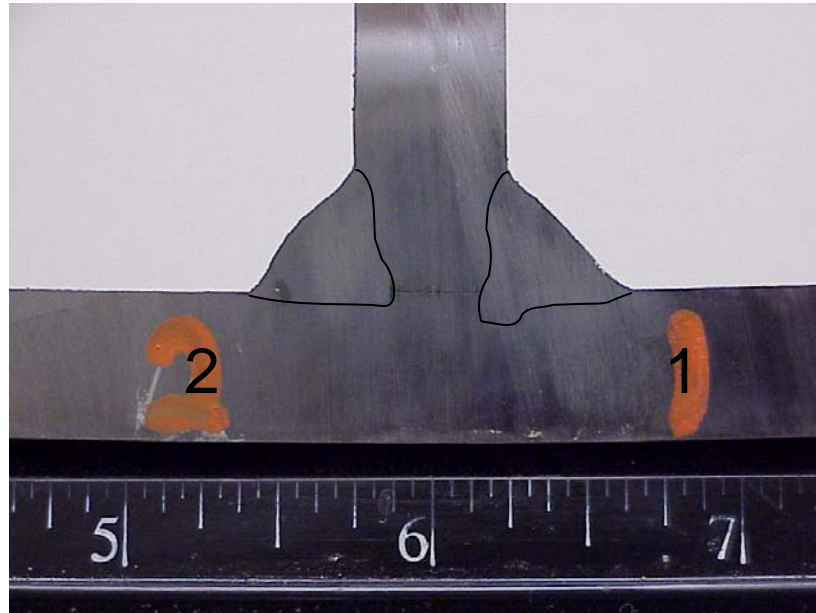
Cross Sections of Welding Runs 1 and 2
